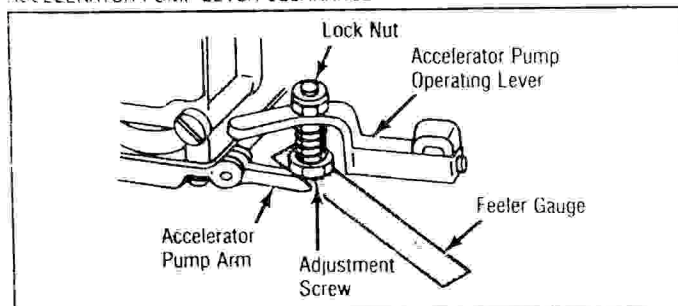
Accelerator Pump Lever Clearance Adjustment
